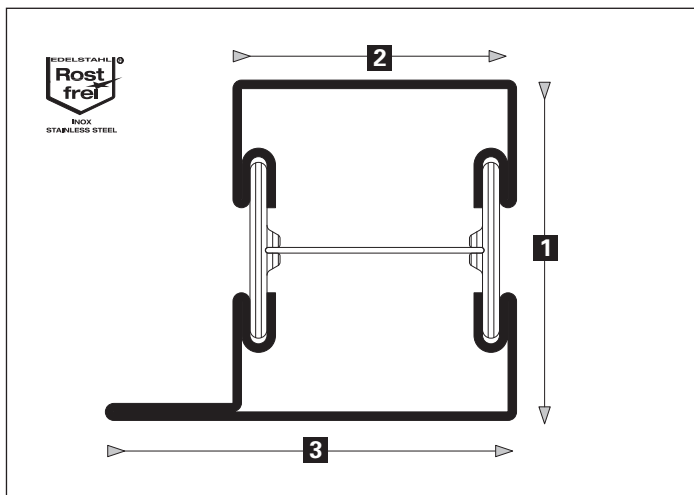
Welding sequence for Janisol stainless steel frame profile
